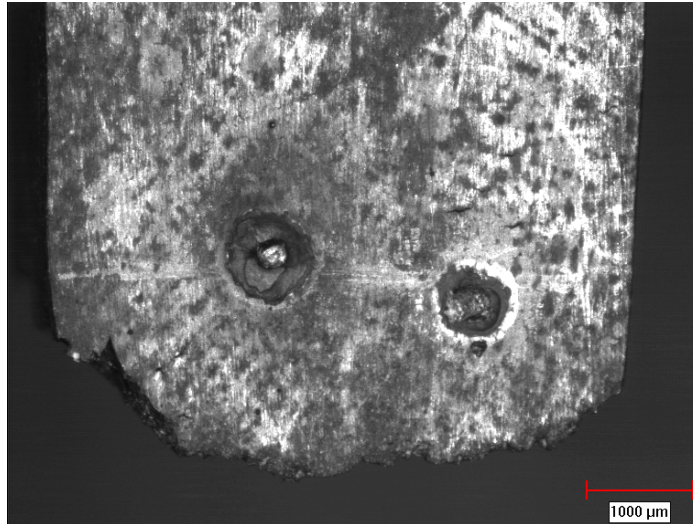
Bottom view of fractured 0.2% mechanical strain Inconel 738 specimen
